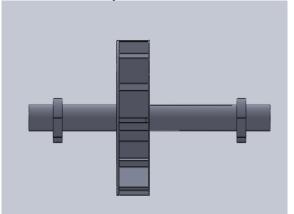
, Axle, Impeller and head cushion assembly (side view)
